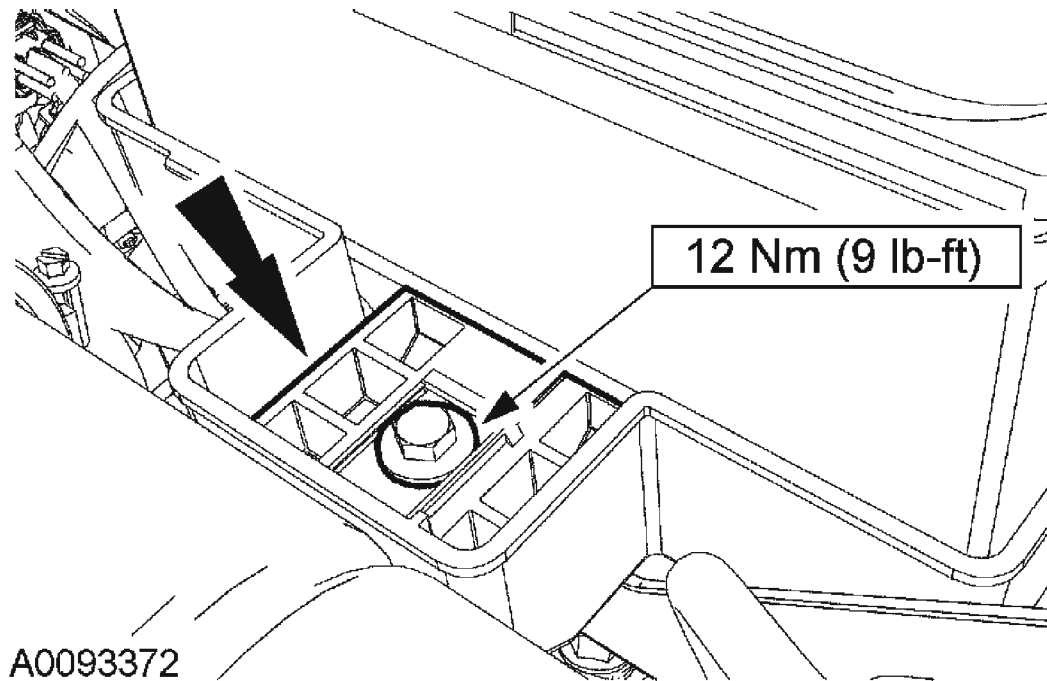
Removing Battery Hold-Down Clamp Bolt
